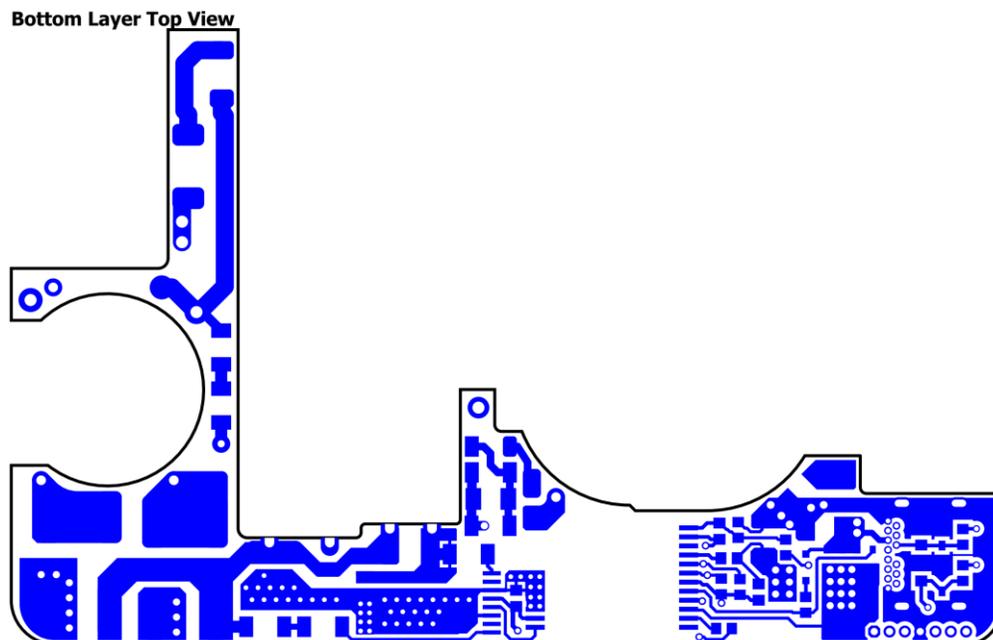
Motherboard Printed Circuit Layout, Bottom.
